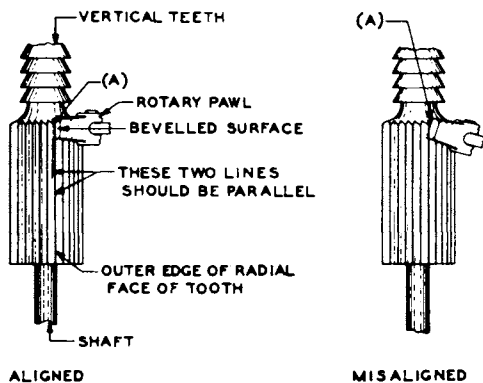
Rotary pawl alignment and misalignment with respect to outer edge of radial face of tooth.
